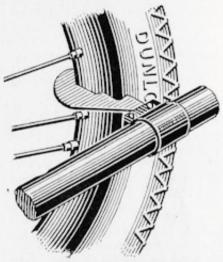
Rear Wheel Alinement Gauge (1932-5 Heavyweights)
